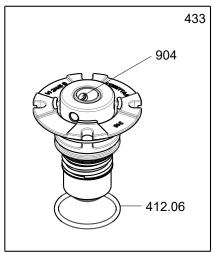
[TPG-20120136-C]: Removing the mechanical seal
